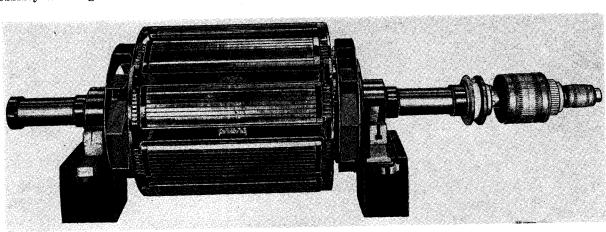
Shop View of a Complete Condenser Rotor Showing Main and Pilot Exciter Armature, COLLECTOR RINGS, CENTRIFUGAL BLOWERS, POLES AND COIL BRACES.
